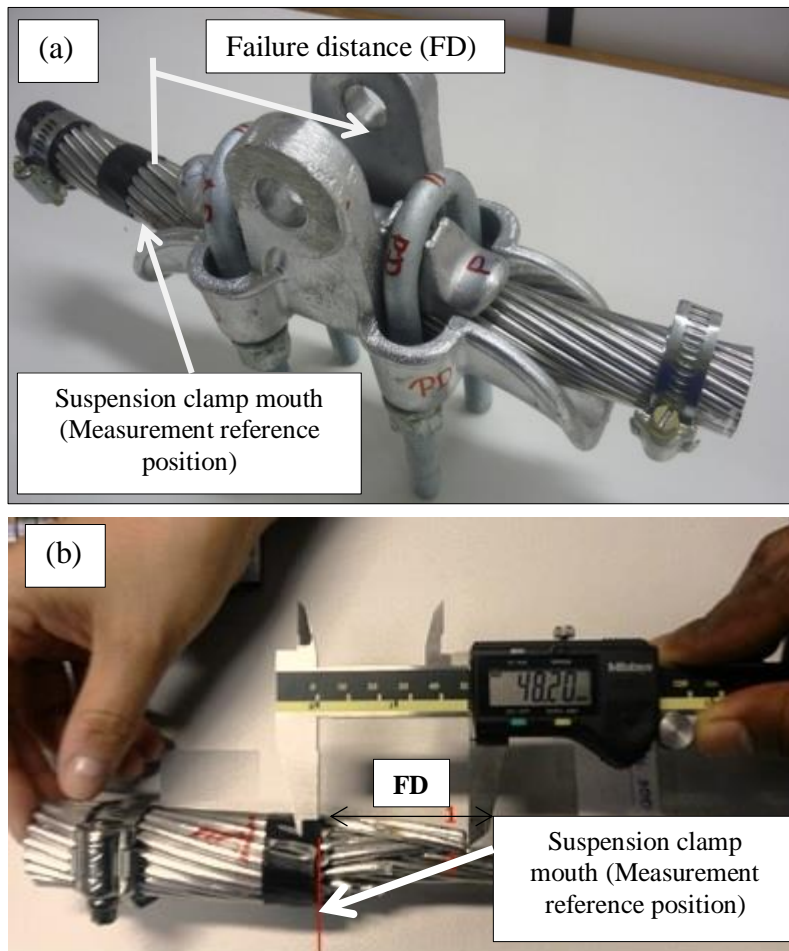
(a) Sample taken from the fretting fatigue test bench; (b) measurement of the distance to wire breaks from the mouth of the suspension clamp which is the reference position
